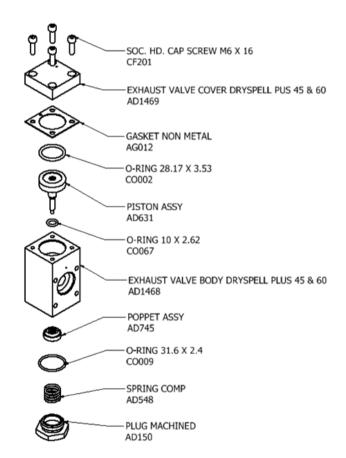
Exploded view of exhaust valve- Dryspell Plus models 45 and 60
